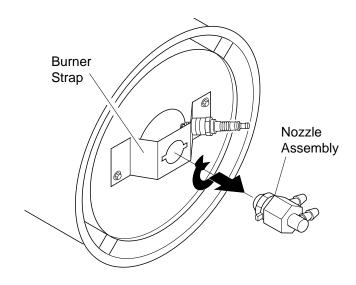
Removing Nozzle Assembly, 30,000 BTU/Hr Model
